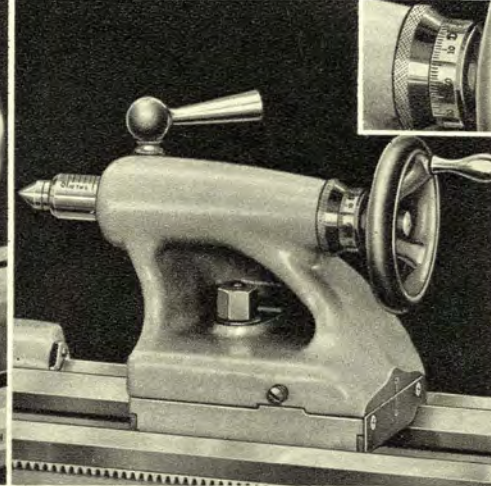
Tailstock Design Used on 10" Swing Lathes
